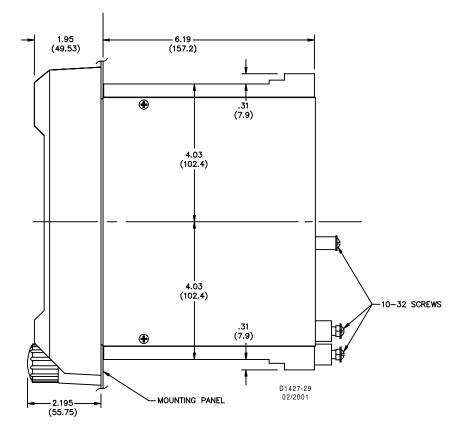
S1 Case, Single-Ended, Semi-Flush Mounting, Outline Dimensions, Side View
